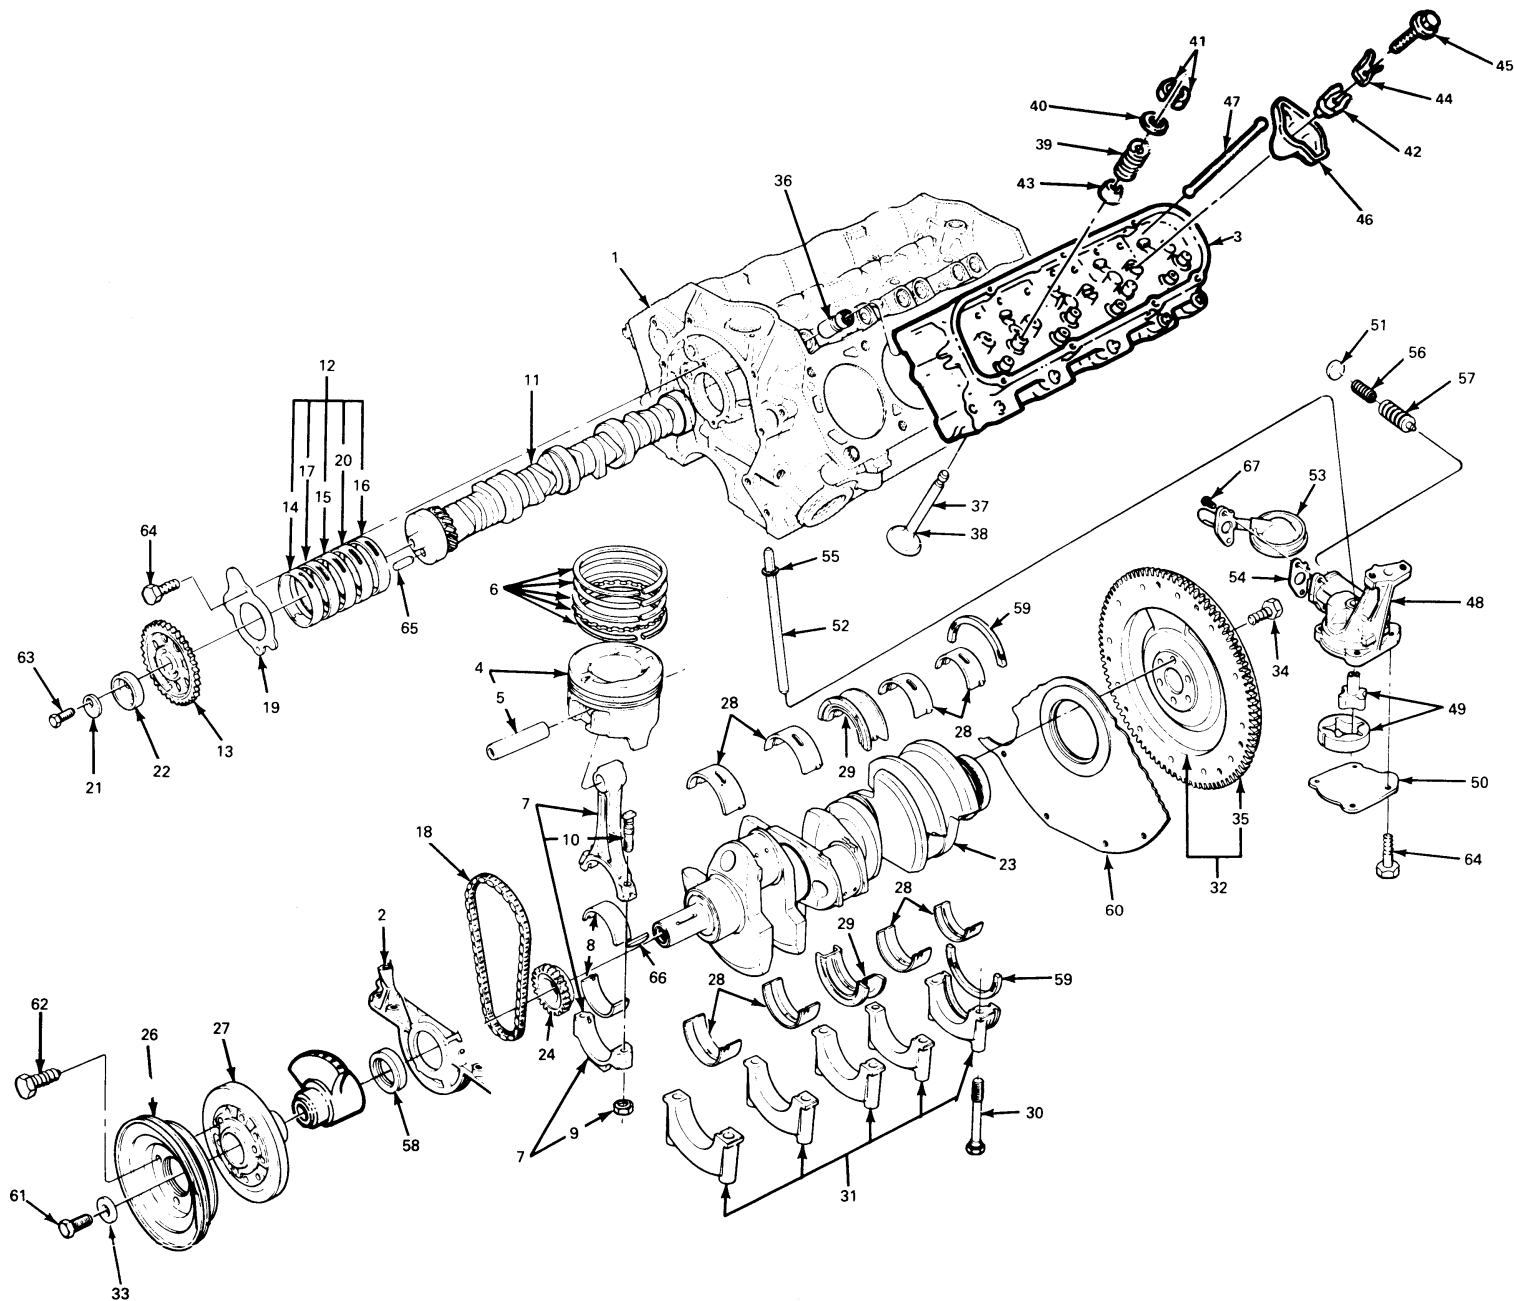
Internal Exploded View—7.5L (460 CID) V-8 Engine
